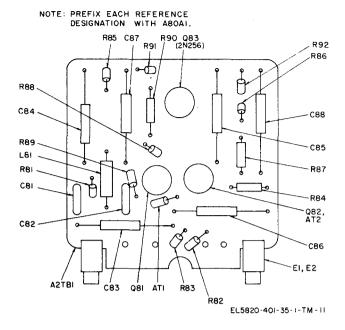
Microphone amplifier A80, printed circuit board assembly A80A1, parts location; latest version.
